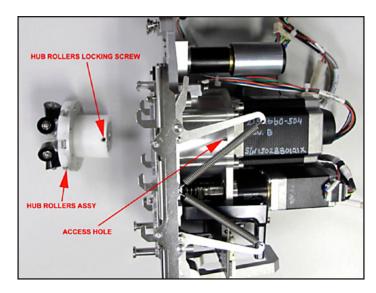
View of Hub Roller Removed from Fluidics Module
